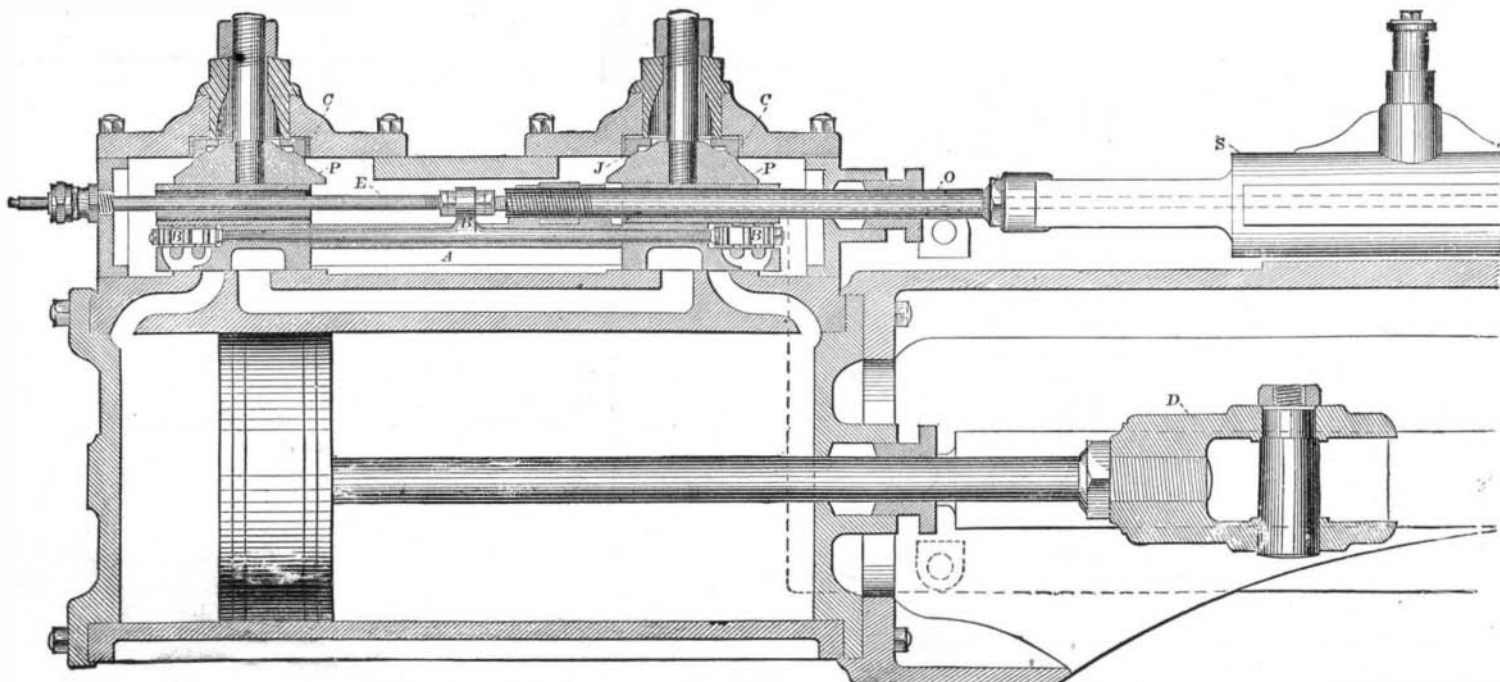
SECTIONAL VIEW OF CYLINDER AND VALVES.
